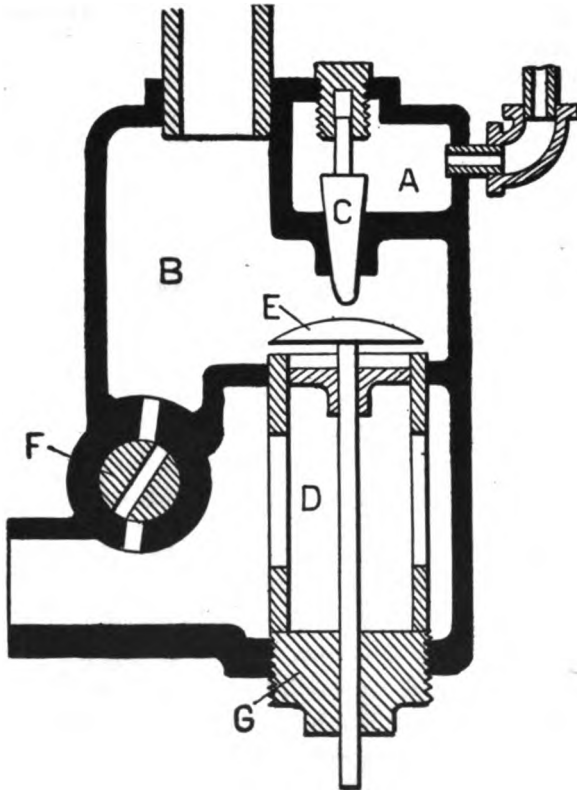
SIMPLE FORM OF CARBURETTER.
